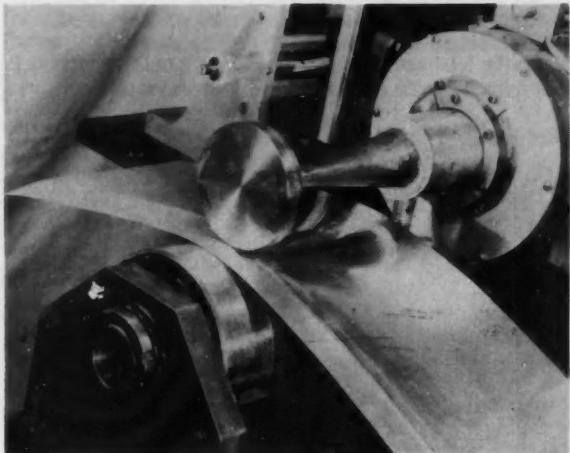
Continuous seam welds can be made with ultrasonic seam welding equipment. The ultrasonic energy is delivered continuously through the disc tip as the work travels between the active disc and the base roller.
